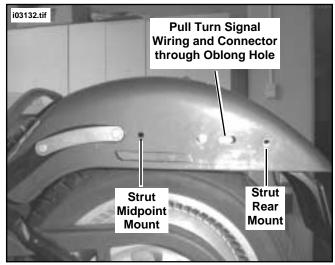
Fender with Cover Capscrews and Strut Cover/Turn Signal Assembly Removed
